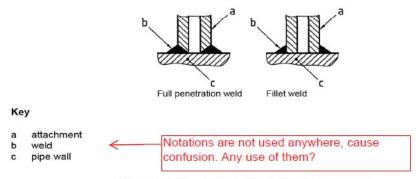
Hollow circular attachment welds
